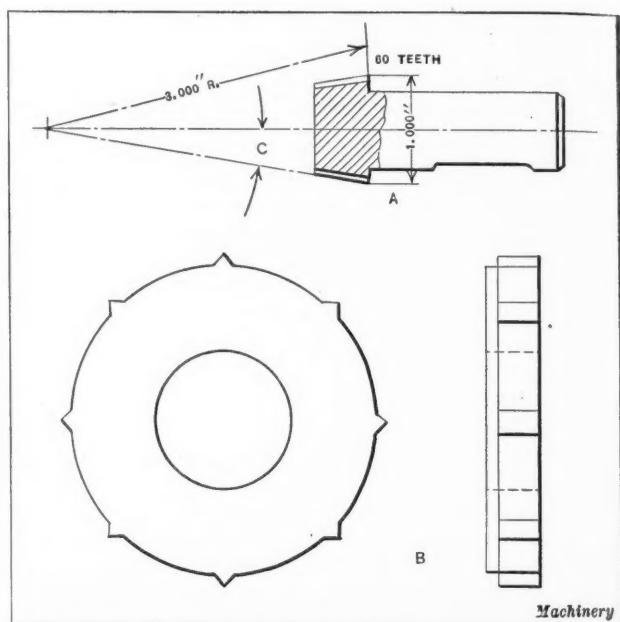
(A) Cutter used for Roll Method of graduating; (B) Tool for Single-tooth Method
